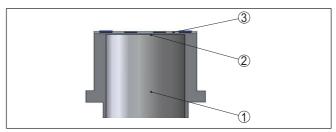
Configuration of the measuring system with strain gauge (DMS) sensor element
